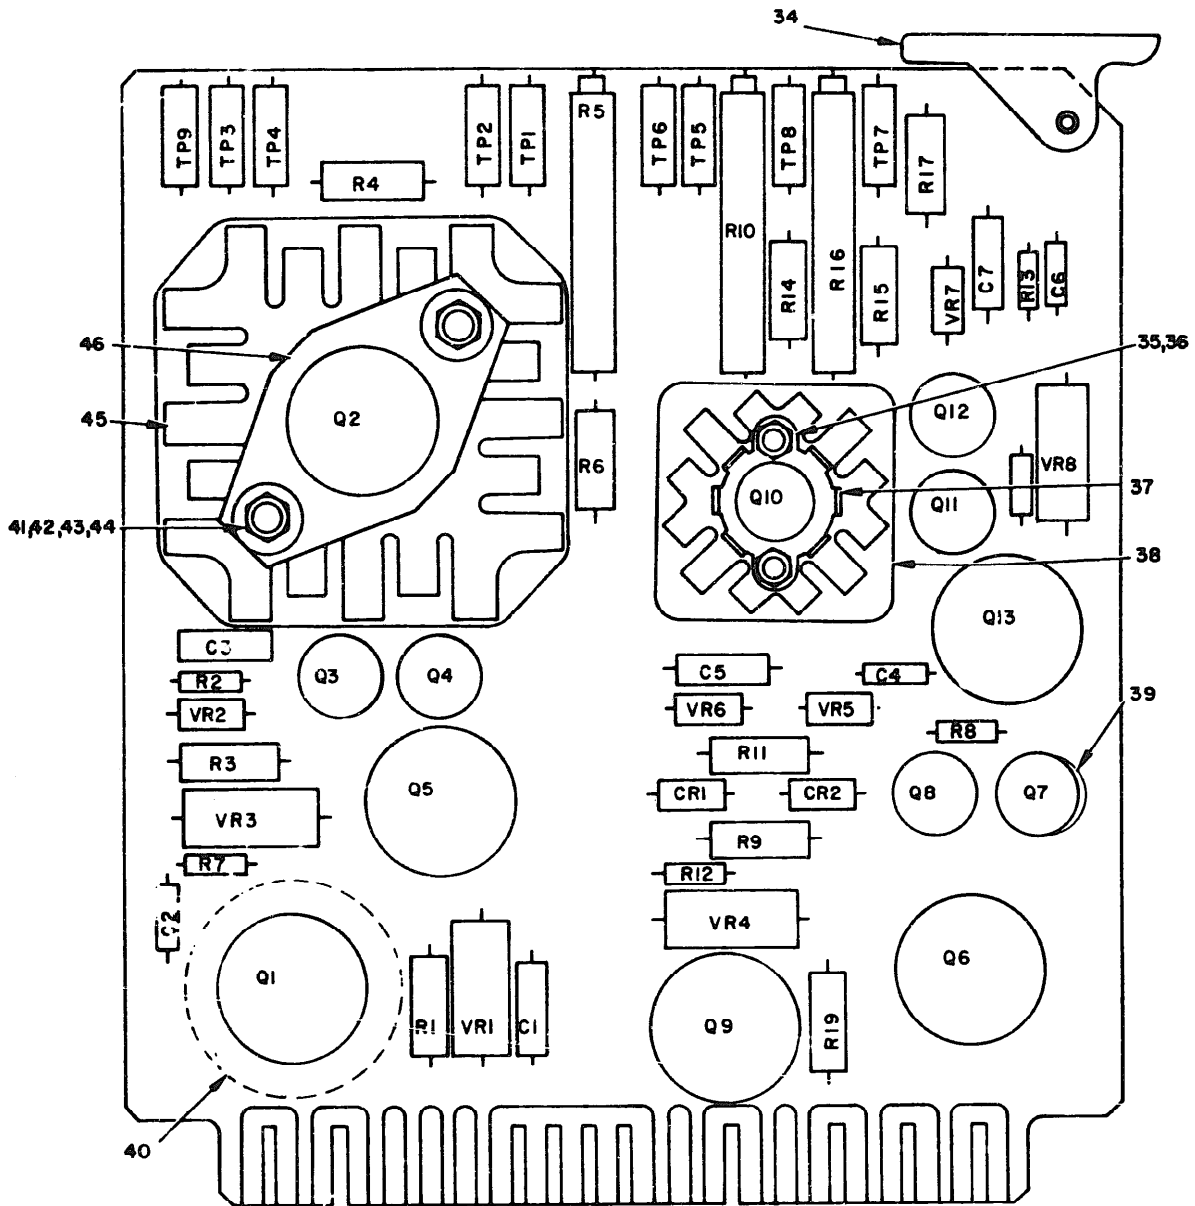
Printed Wiring Assembly (A7), Legend (Sheet 2 of 2).
